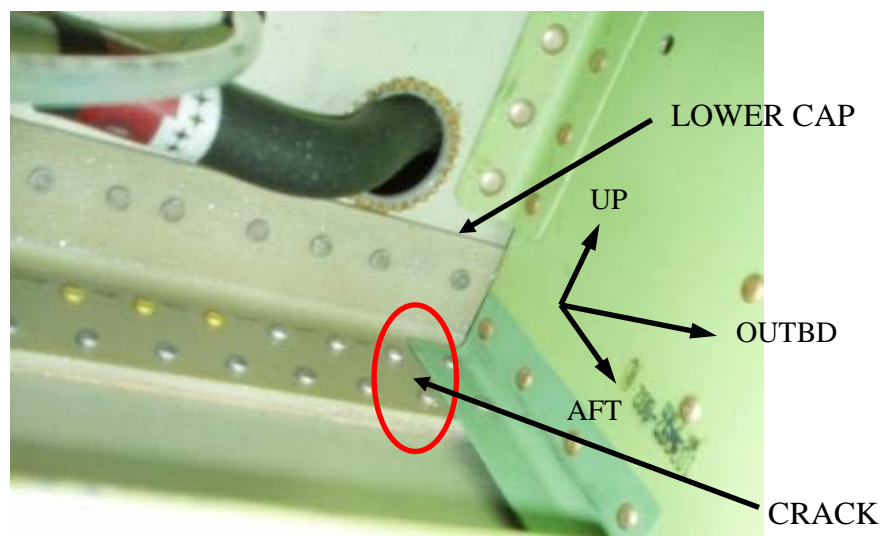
Detail view of damage area inside wheel well (view looking forward and down)
